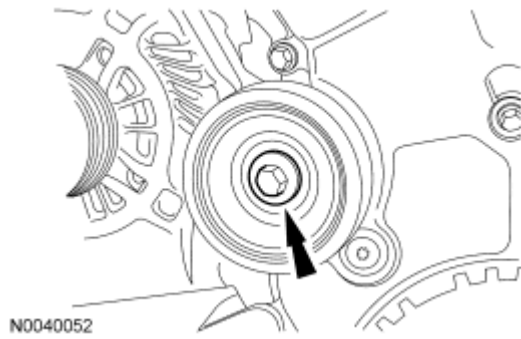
Locating Accessory Drive Belt Idler Pulley Bolt
